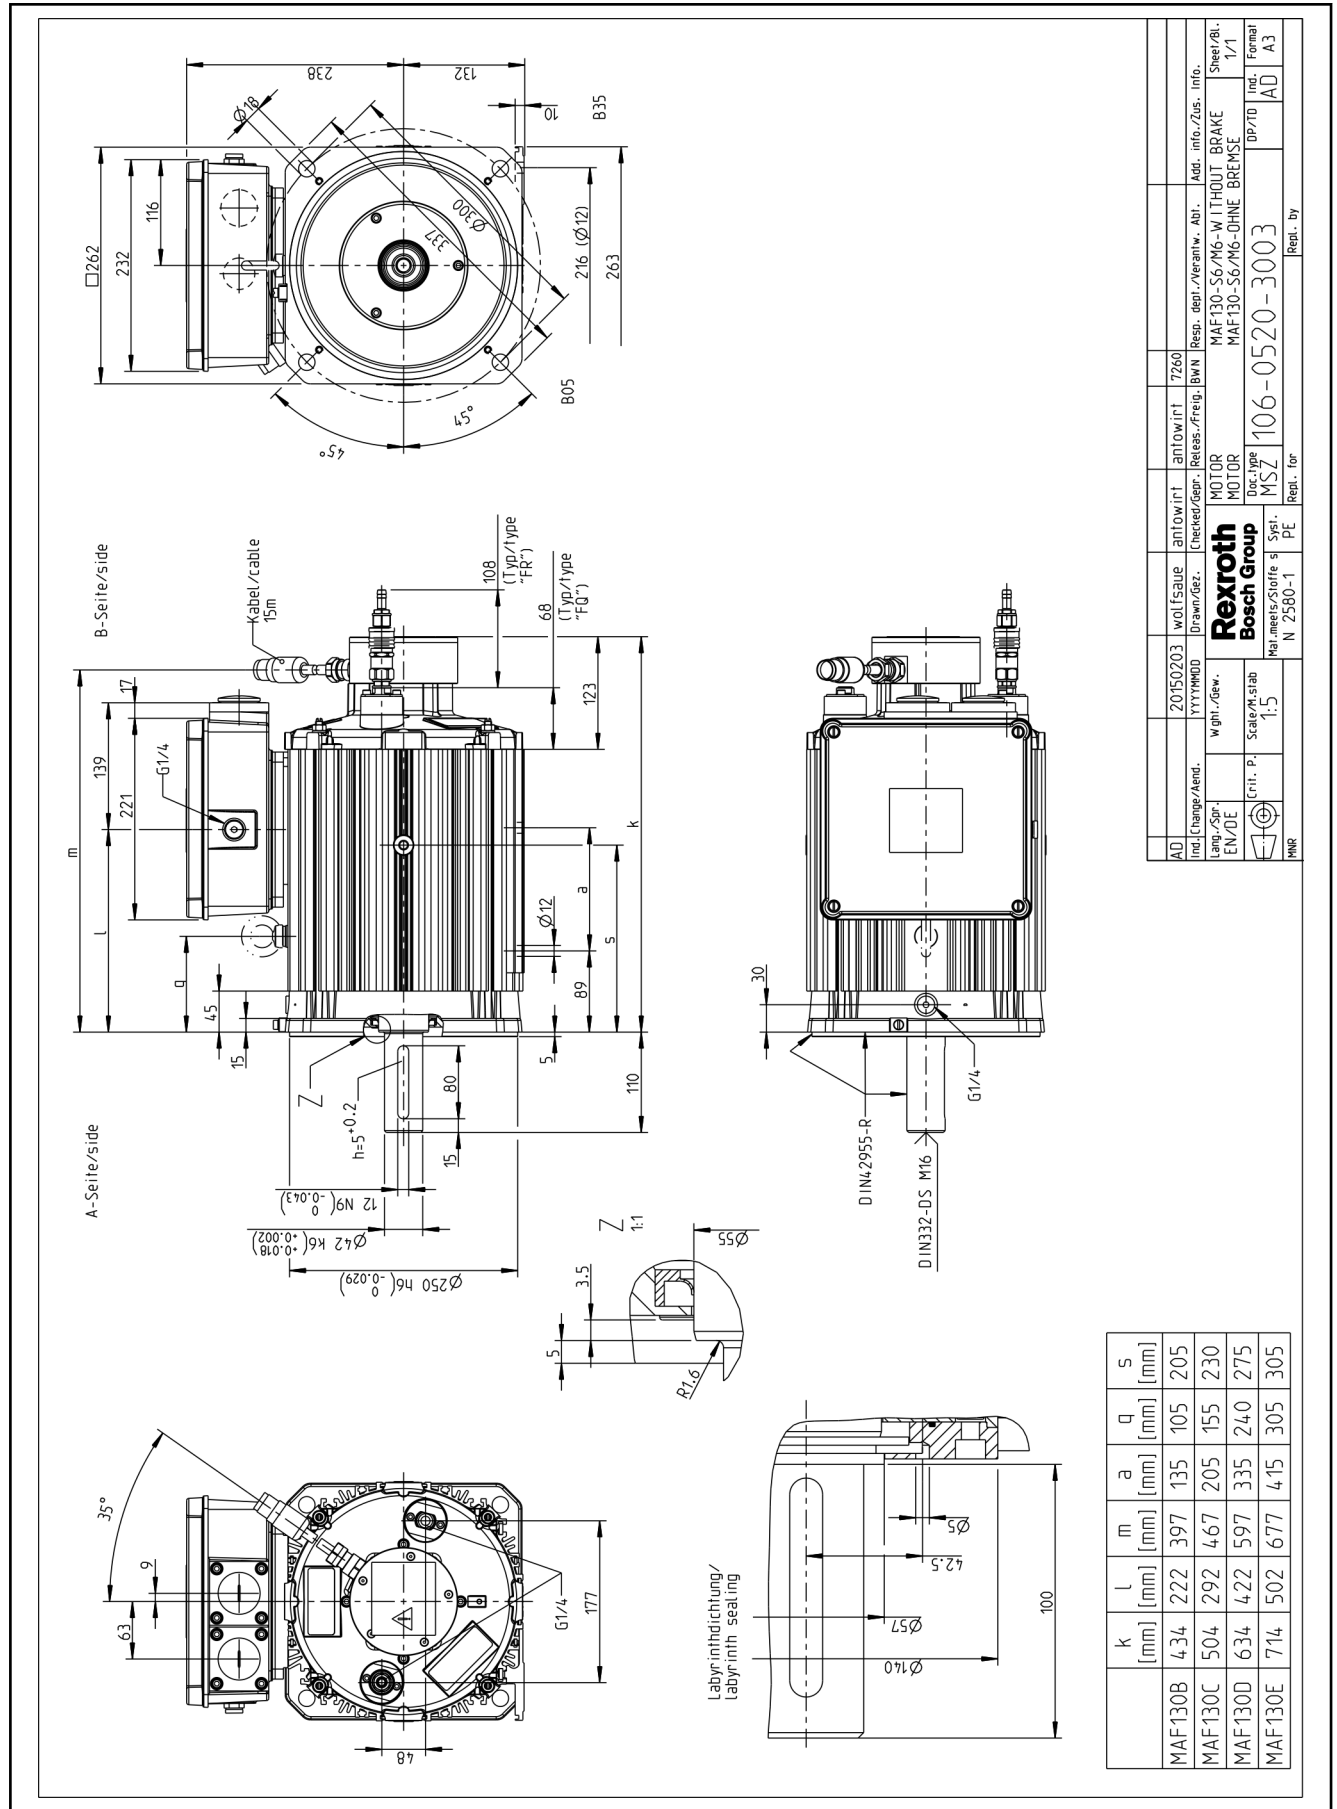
MAF130 with M6/S6 encoder, without brake
